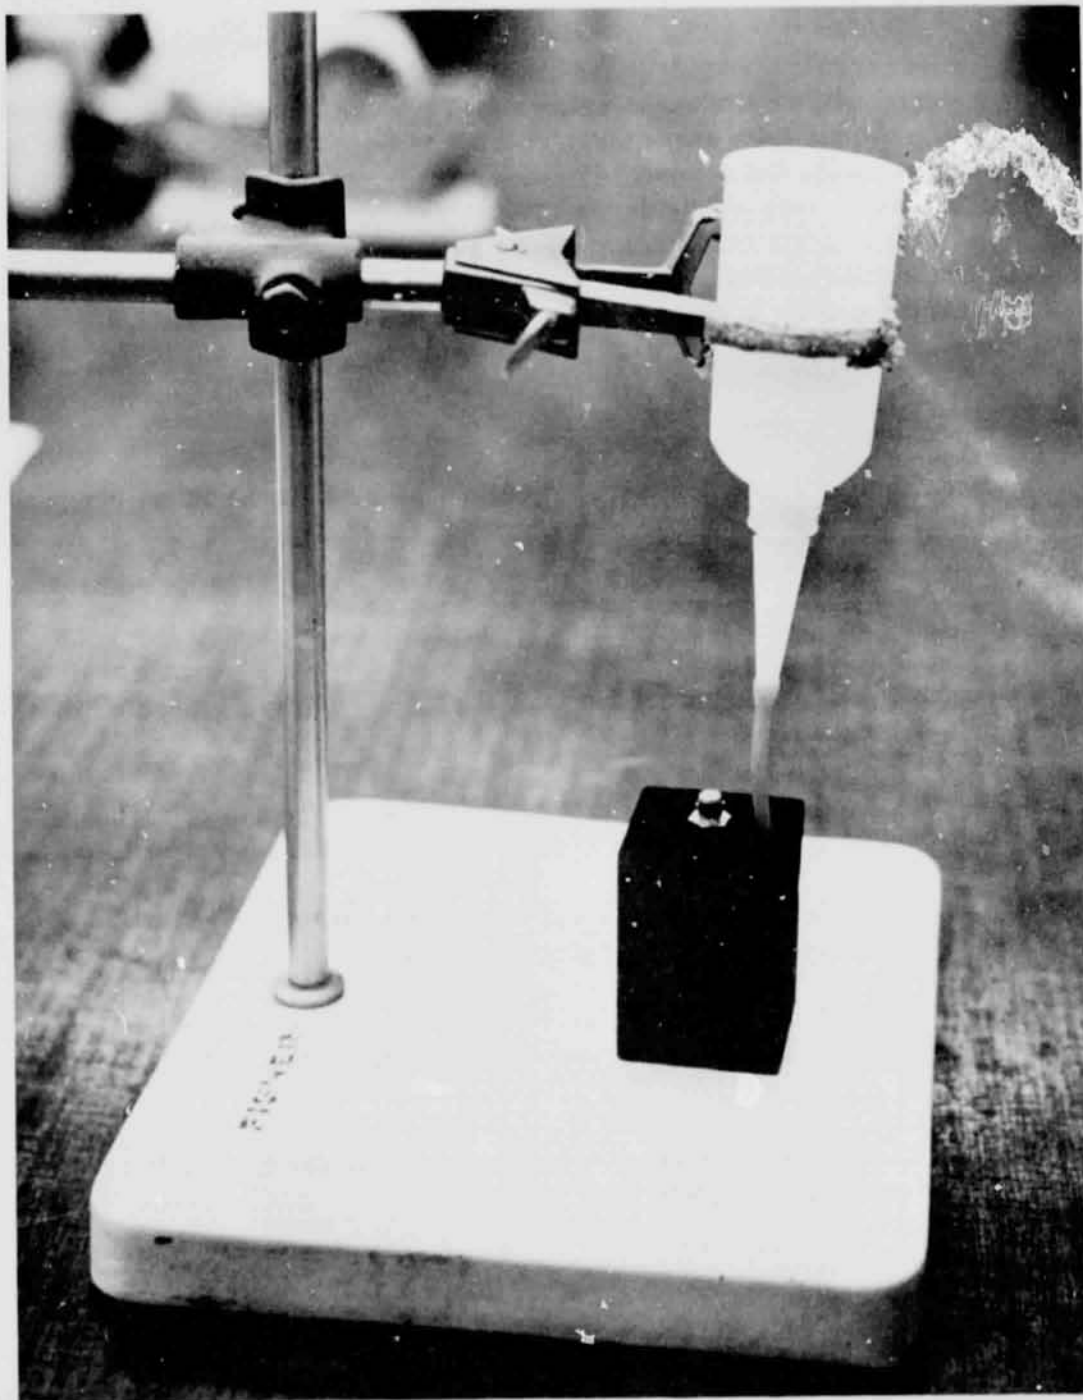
G75-01463 Gravity feeding of encapsulating material into self-contained assembly with small openings.
